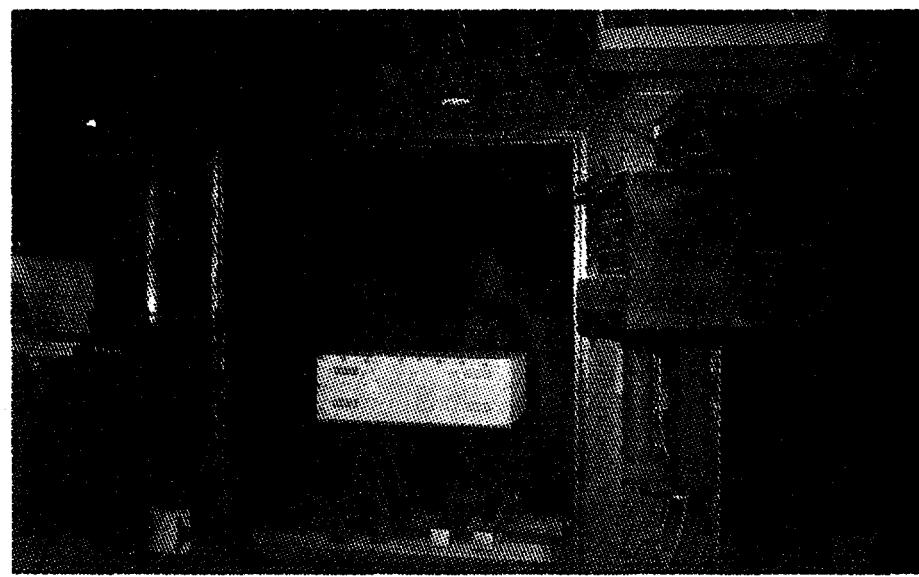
The Retech VIM with the Door Open and a Mold Box in Place.
